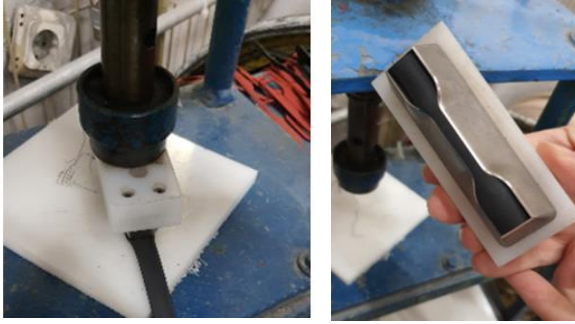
The cutting of the test pieces. Figure 4. The pieces cut.
